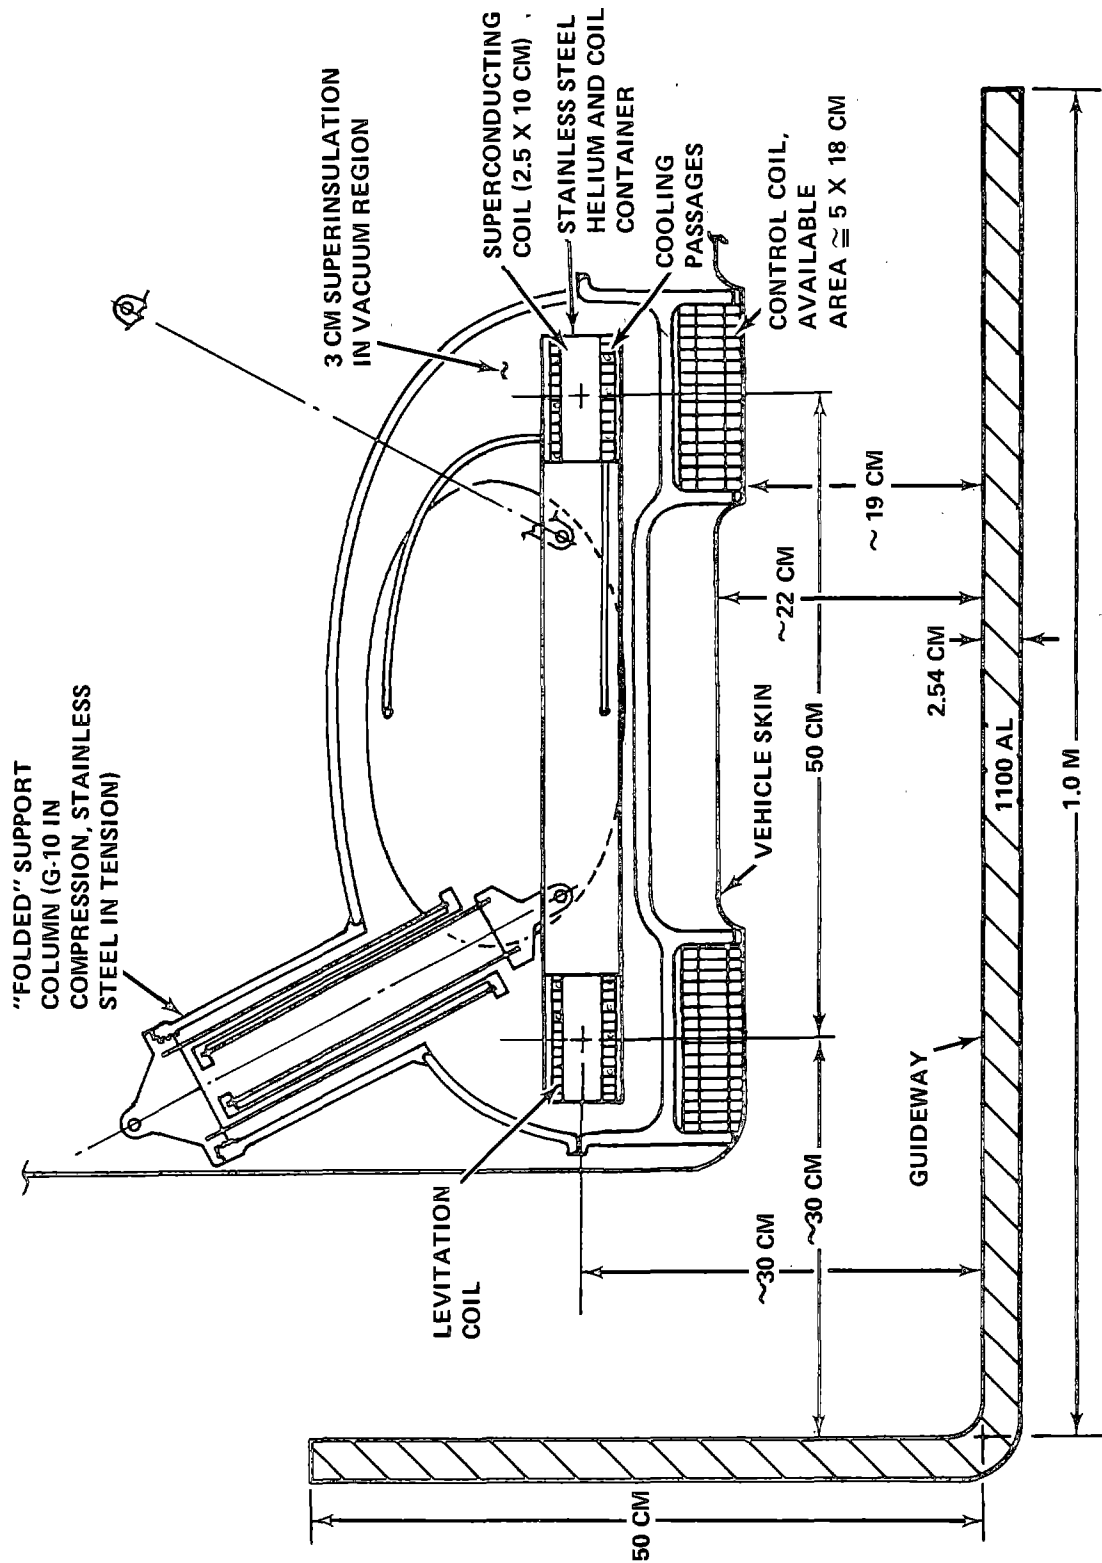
CROSS SECTION OF MAGNET ASSEMBLY WITHOUT SHIELDING COIL
